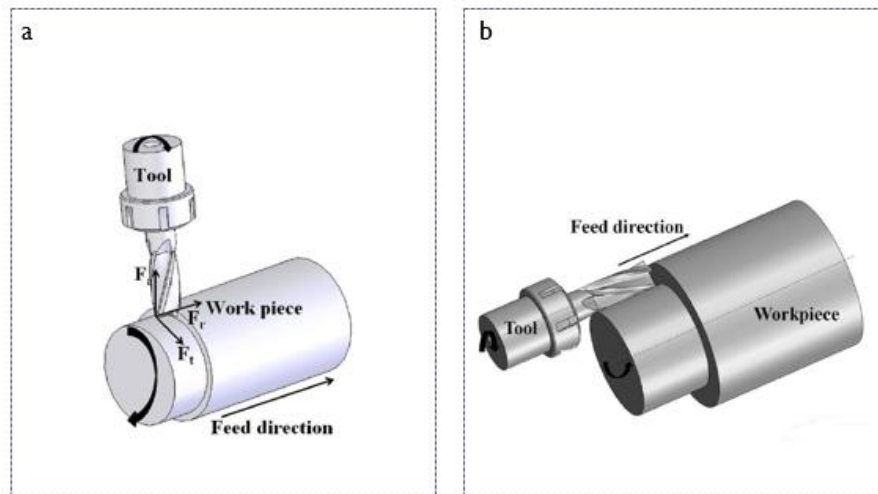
a) orthogonal turn-milling b) co-axial turn-milling
